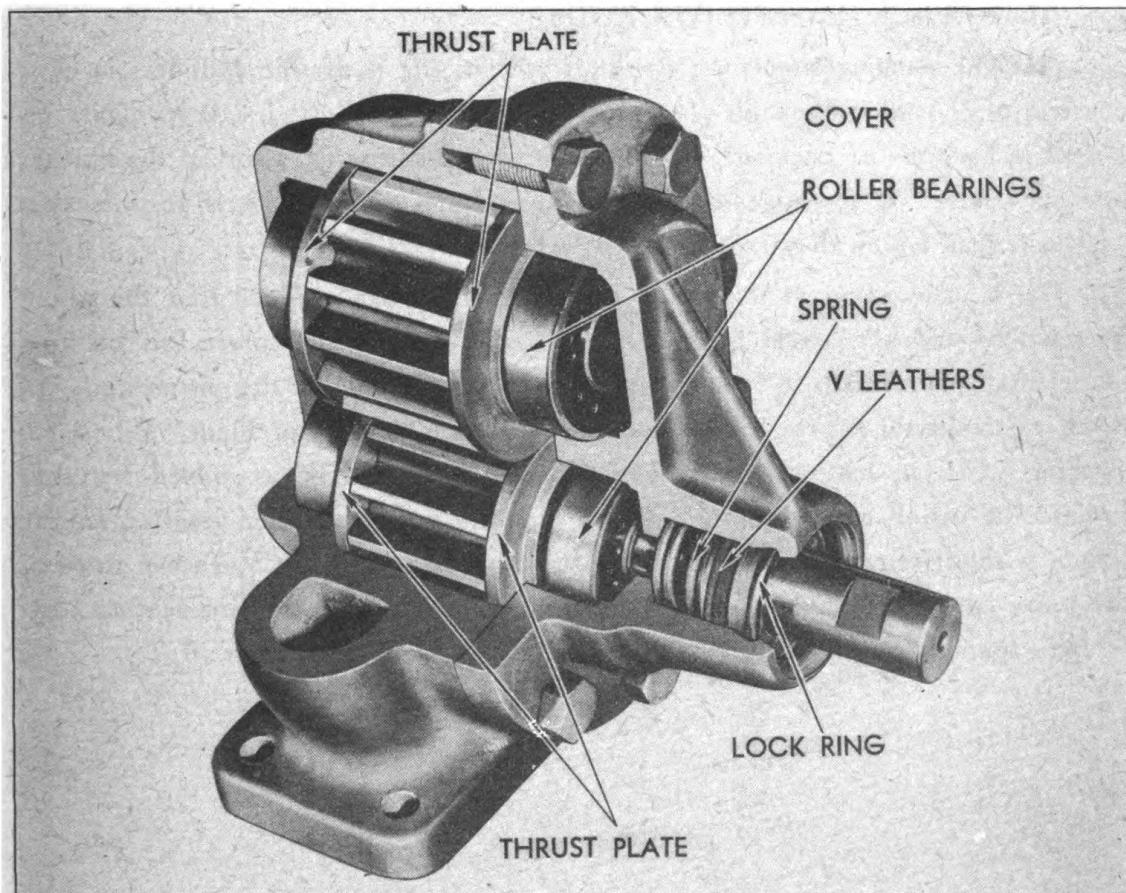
Cutaway View of Hydraulic Pump Showing Parts
